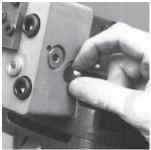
Install Servo Pressure Shuttle Ball Valve
